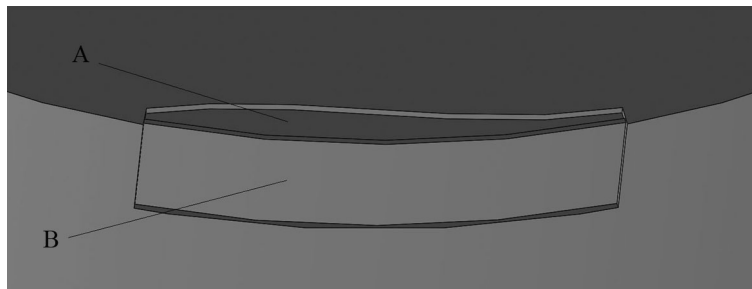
Contact surfaces on rake face (A) and flank (B).
